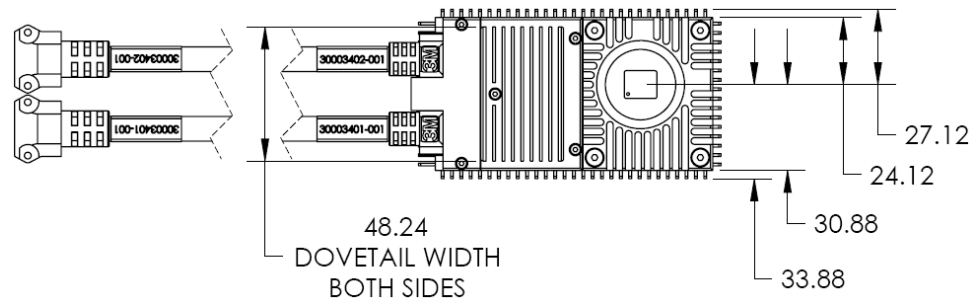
HG-CH Camera Head dimensions and mounting holes, front (in mm)
